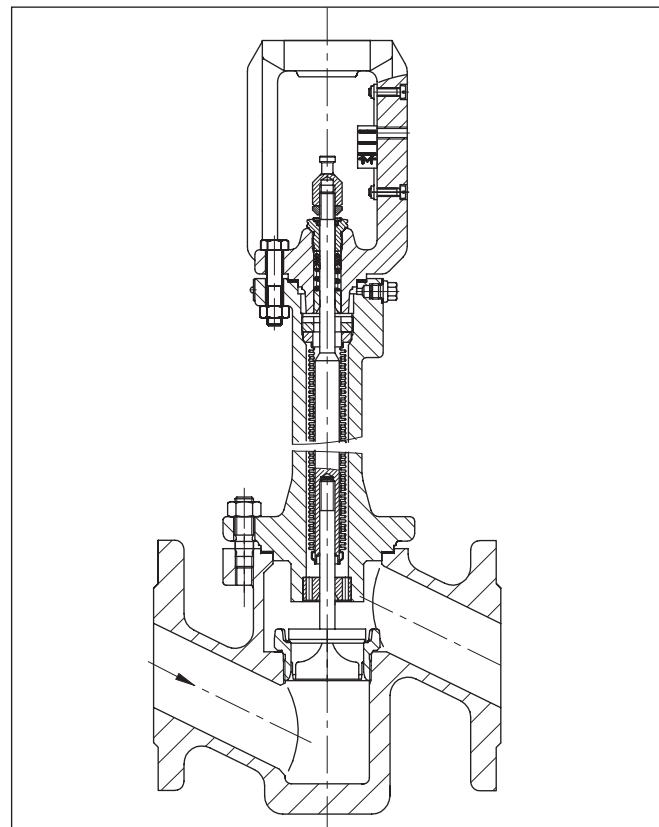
· Type 3241 Globe Valve, forged steel version (up to size 3") with metal bellows seal module
